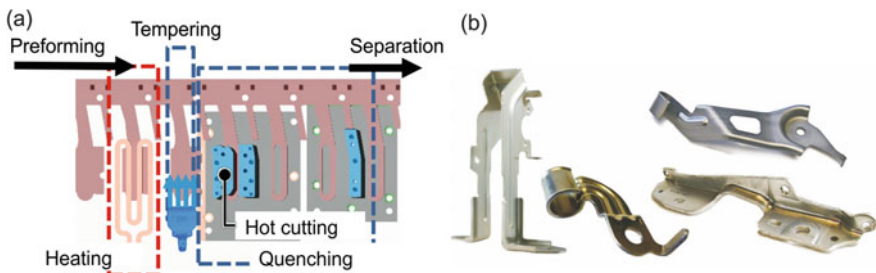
Heat-assisted stamping in progressive dies: a Strip and tool layout, b Exemplary components
